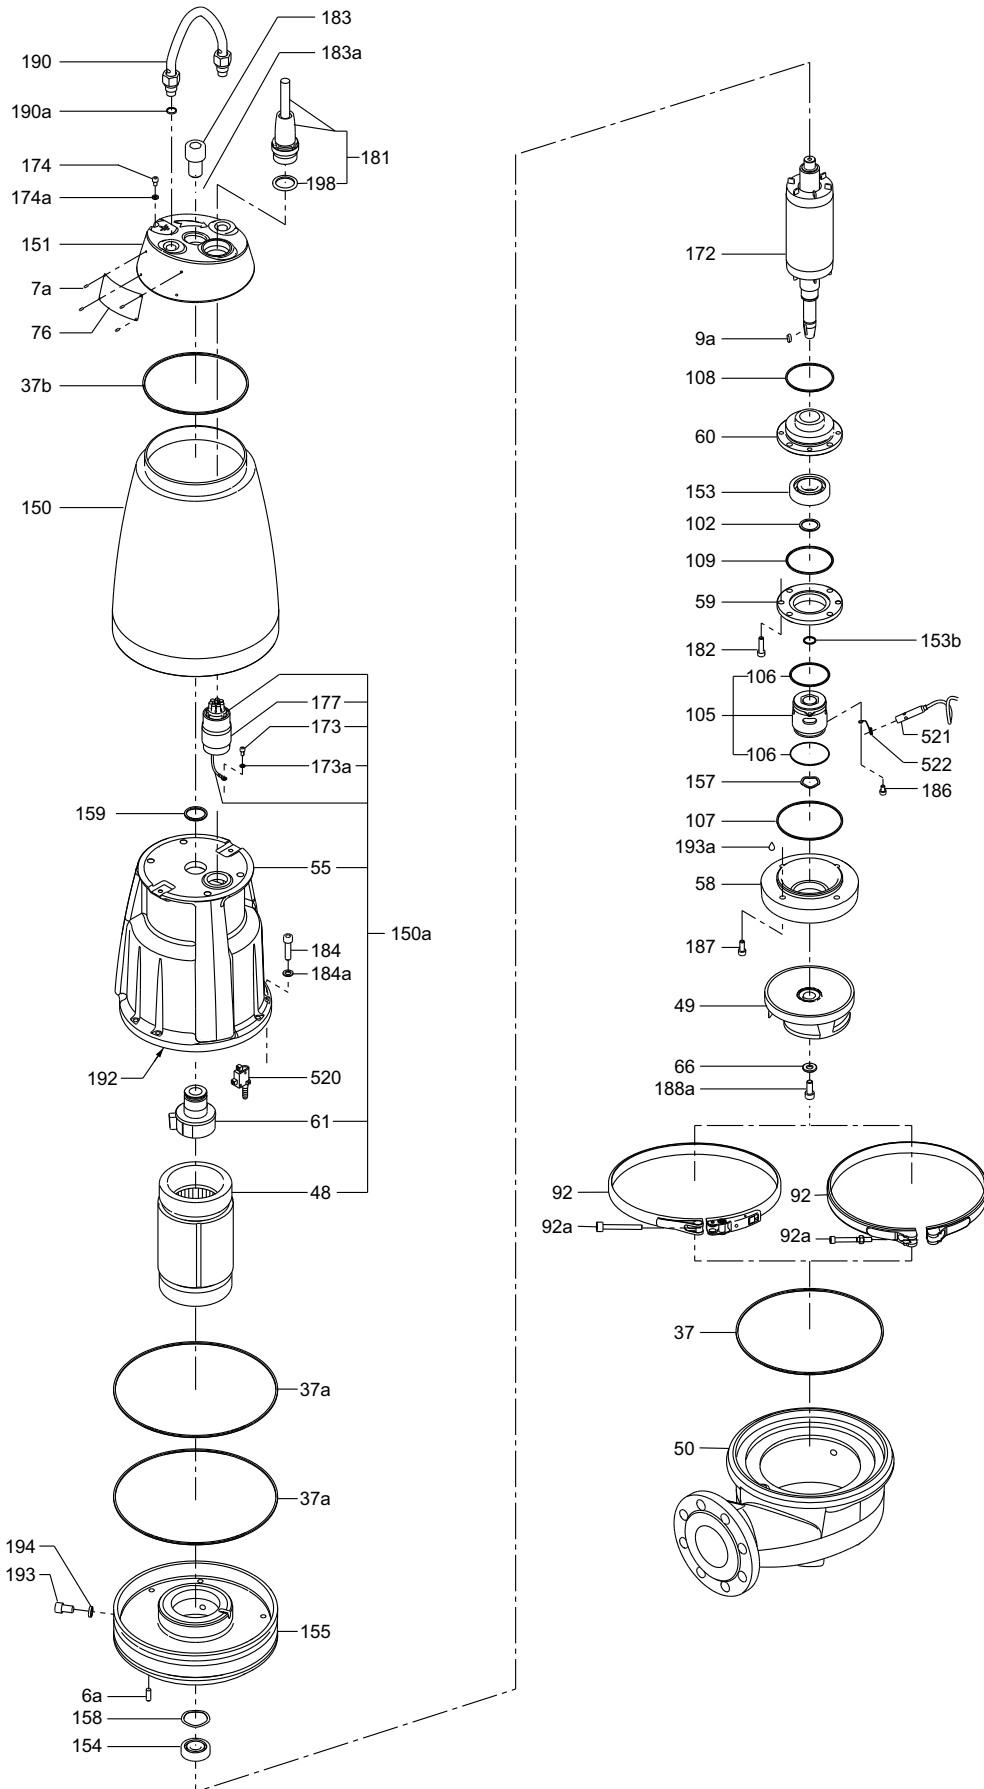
Exploded view, SEV pump with SuperVortex impeller, sensor version
